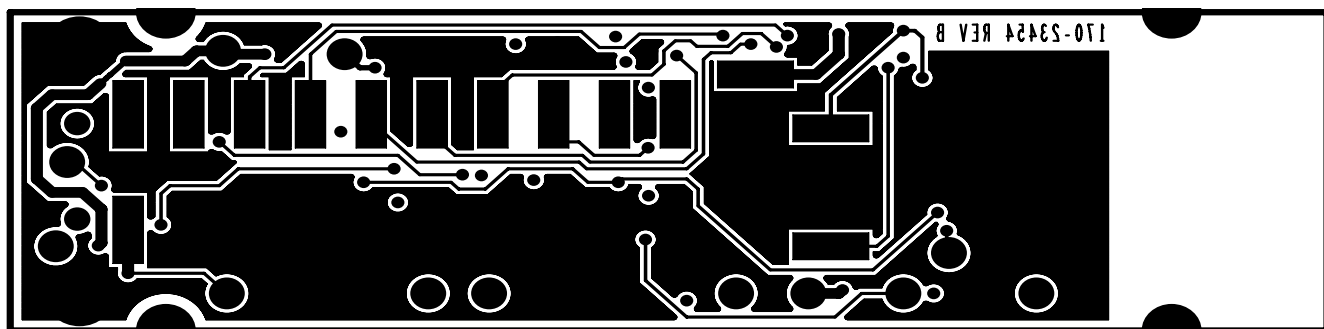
1322x USB Dongle PCB Layout (Bottom View)
